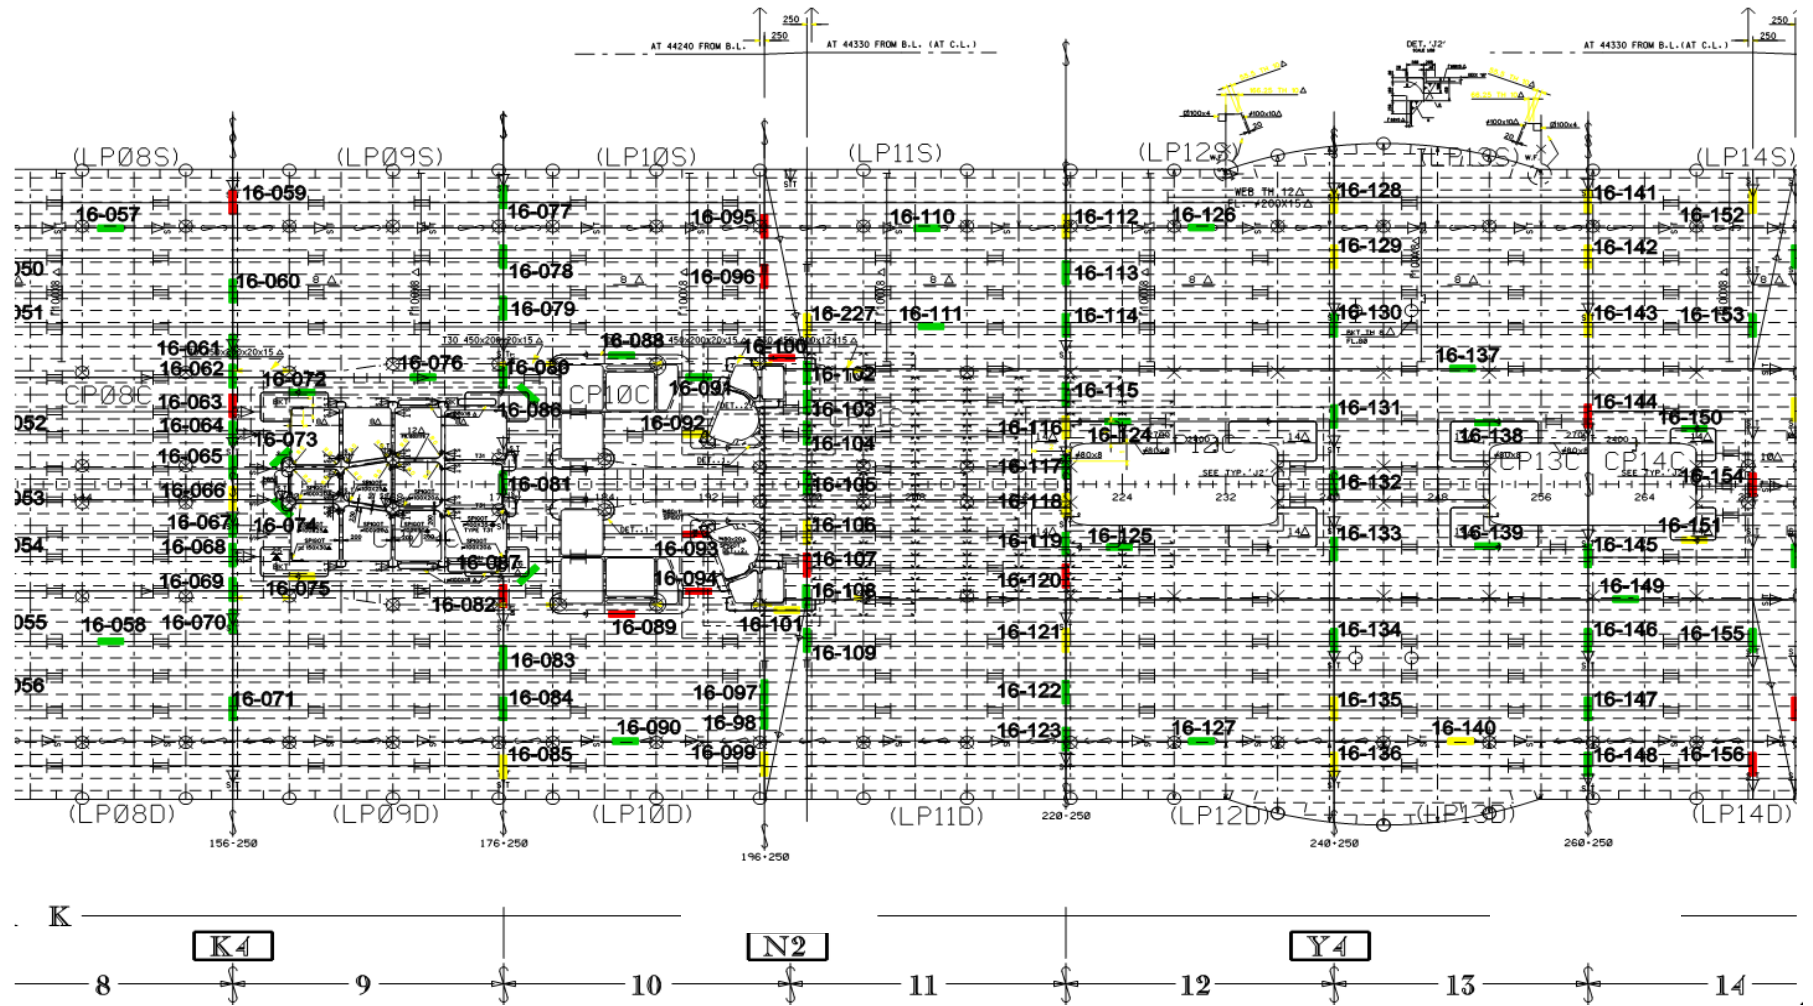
Existing inspection plan for deck 16 (mid ship)
